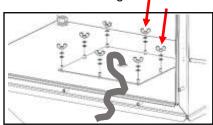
Placement of Removable Plate inside bottom of charger (optional Cable Gland not shown)
